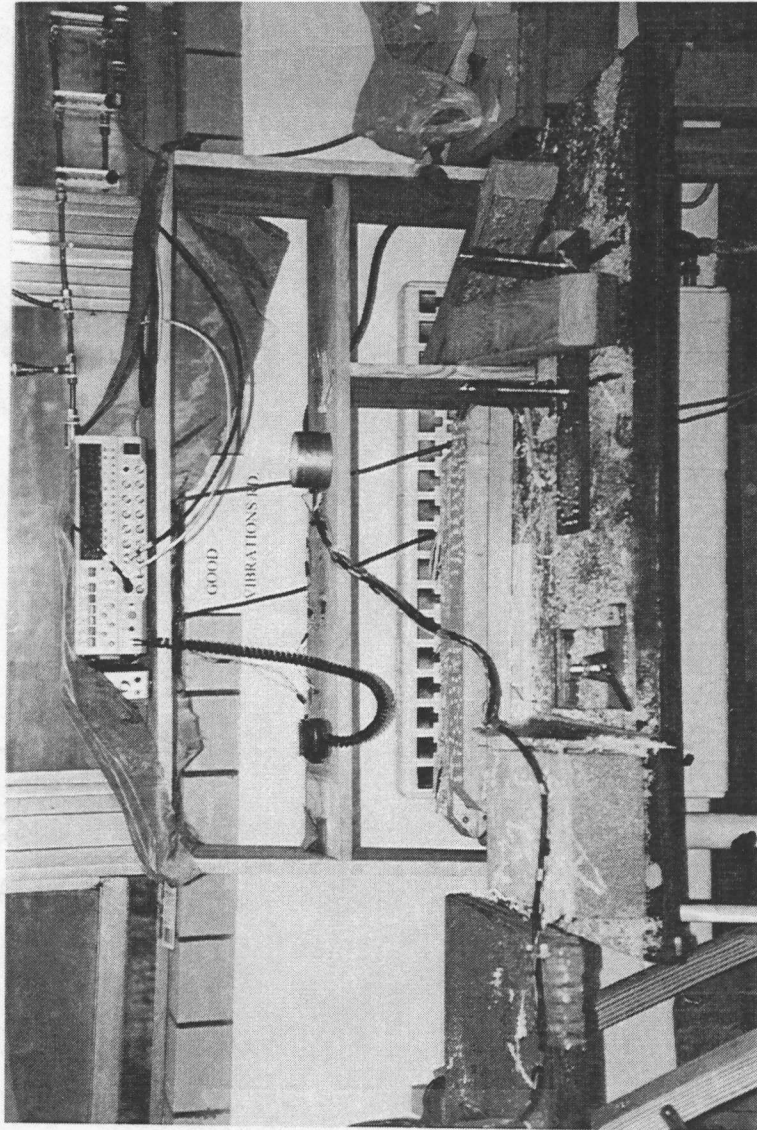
Testing fixture used for conducting mechanical vibration drilling experiments.
